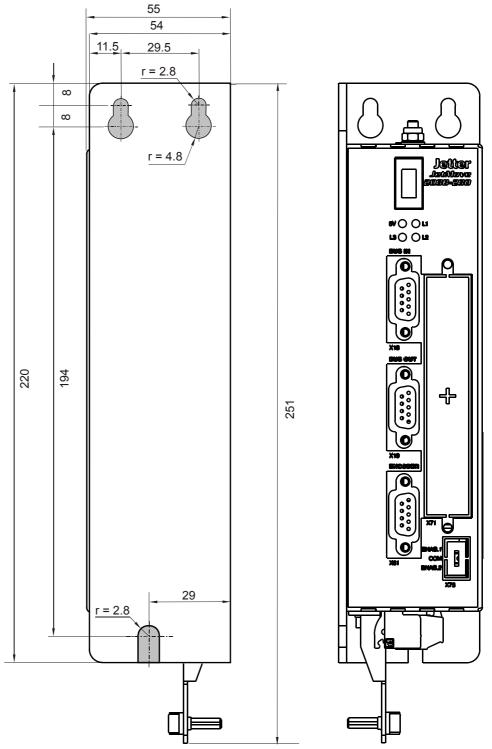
Rear and front view of the JetMove 203B-230 enclosure with mounting holes
